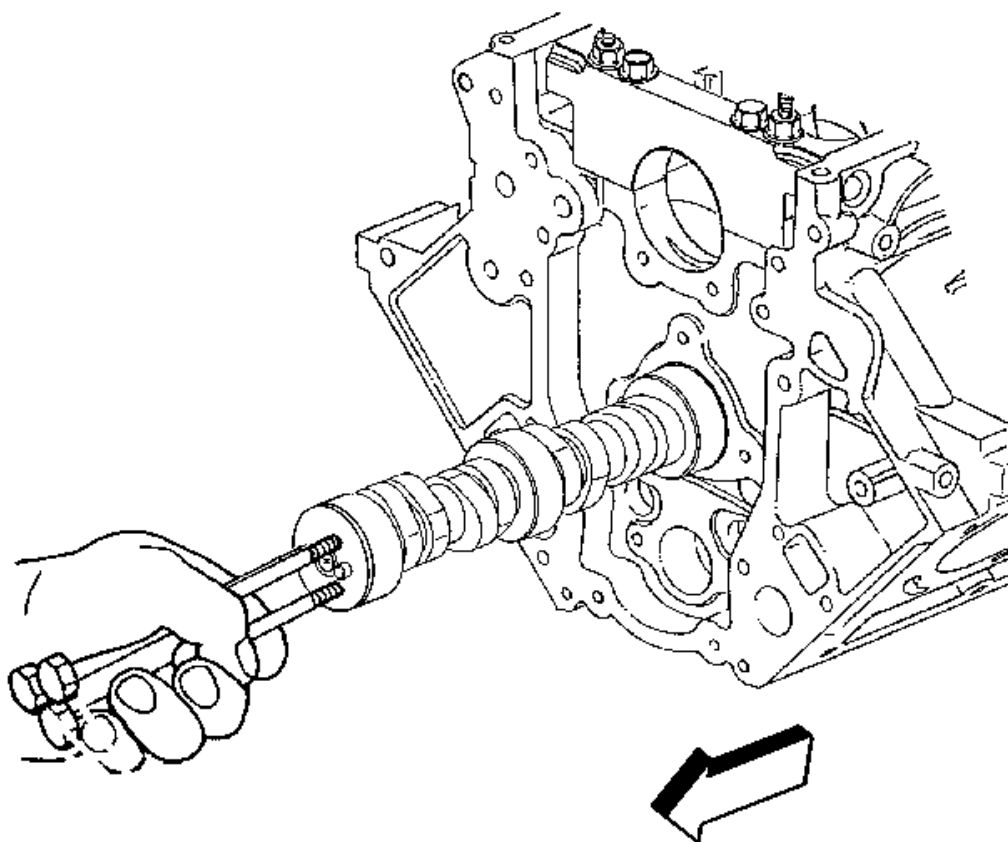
View Of Bolts installed In Camshaft Front Bolt Holes
